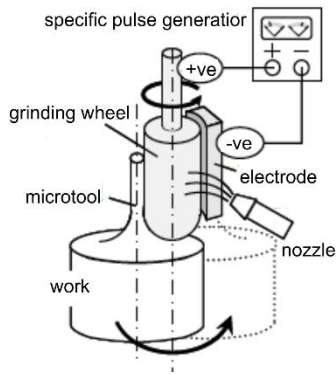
Example of ELID grinding setup for generation micro-tools [177].
